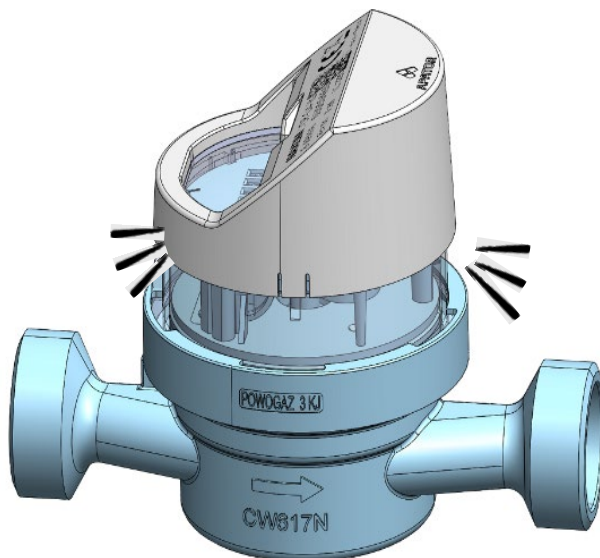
View of the assembled JS Smart + water meter with the OP-04-1b module.
